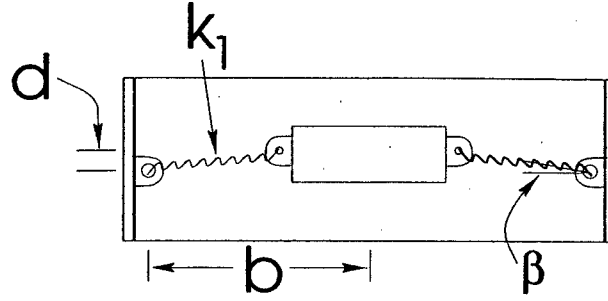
Non-linear loading device. Presented in cross-section. Dimensions labeled are the critical dimensions in the design.
